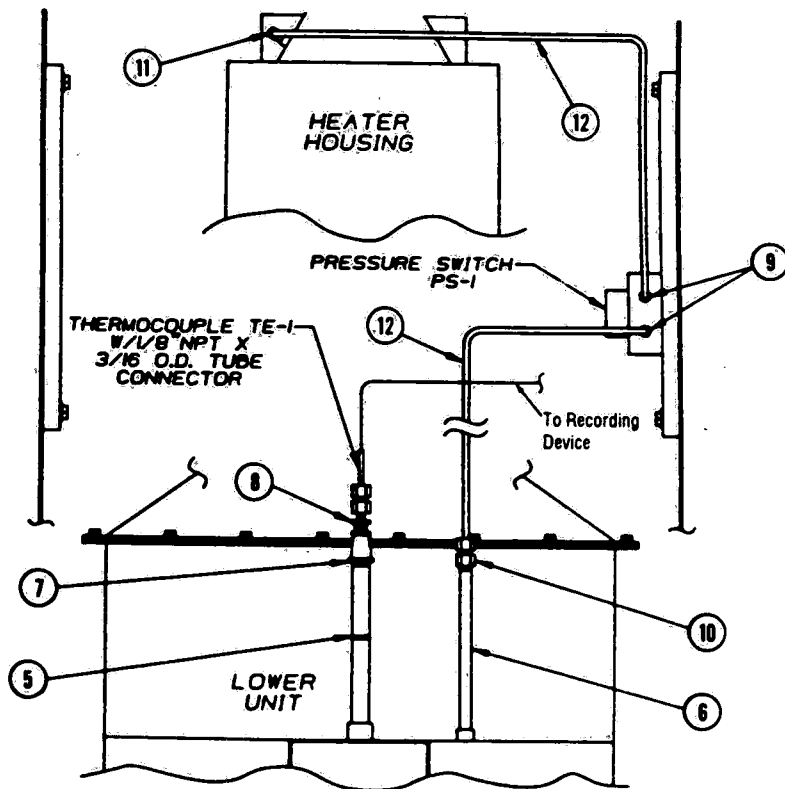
EO Disposer Assembly (Part 2 of 3)
